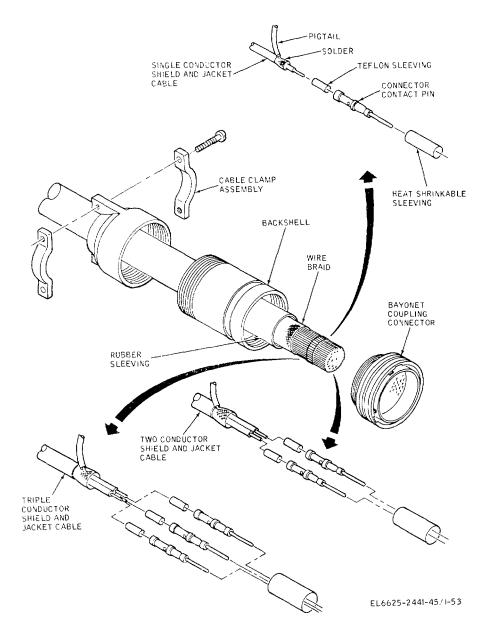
Special propose electrical cable assembly, typical shielded cable configuration and connector removal diagram.
